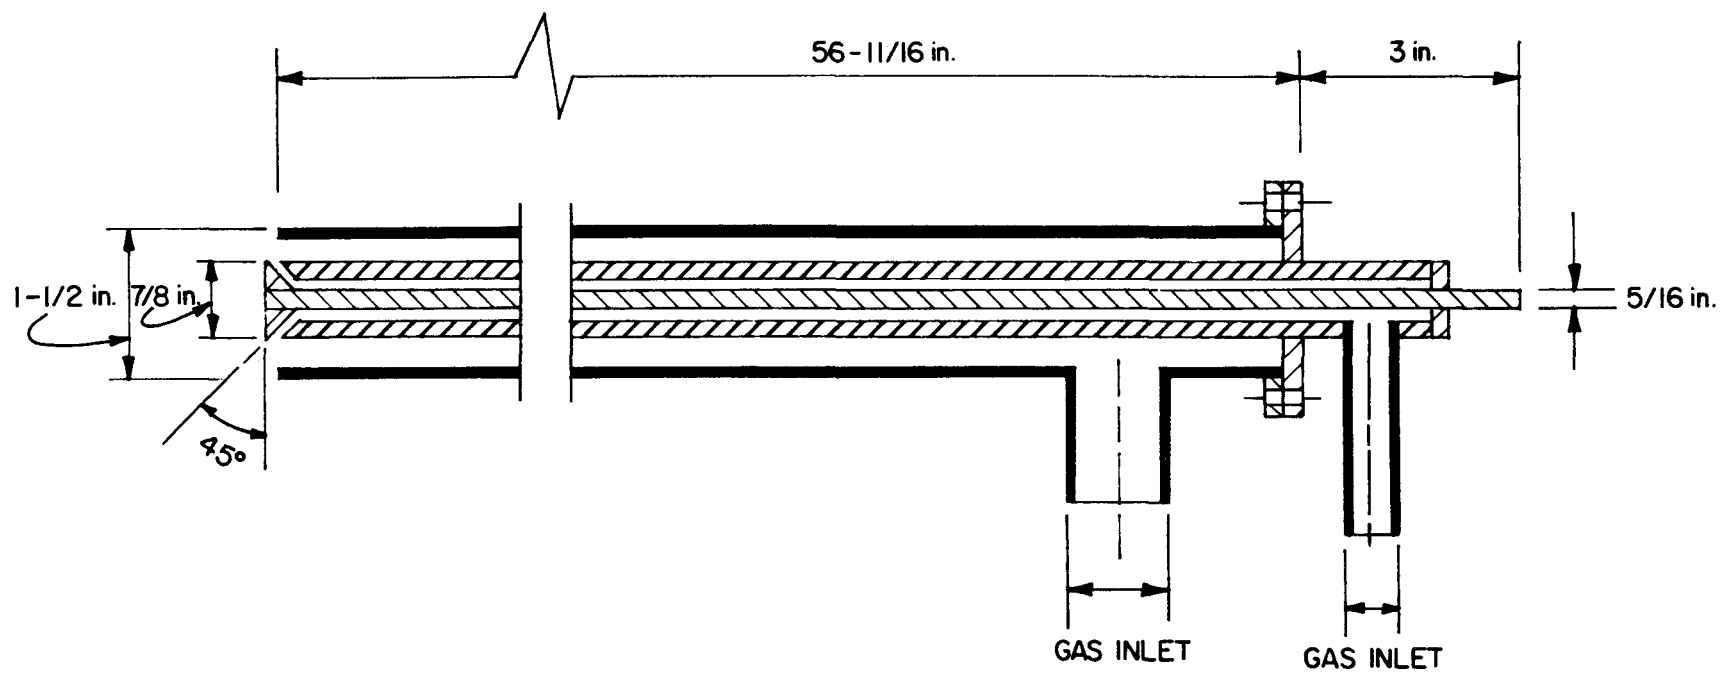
SCHEMATIC DRAWING OF KILN BURNER
